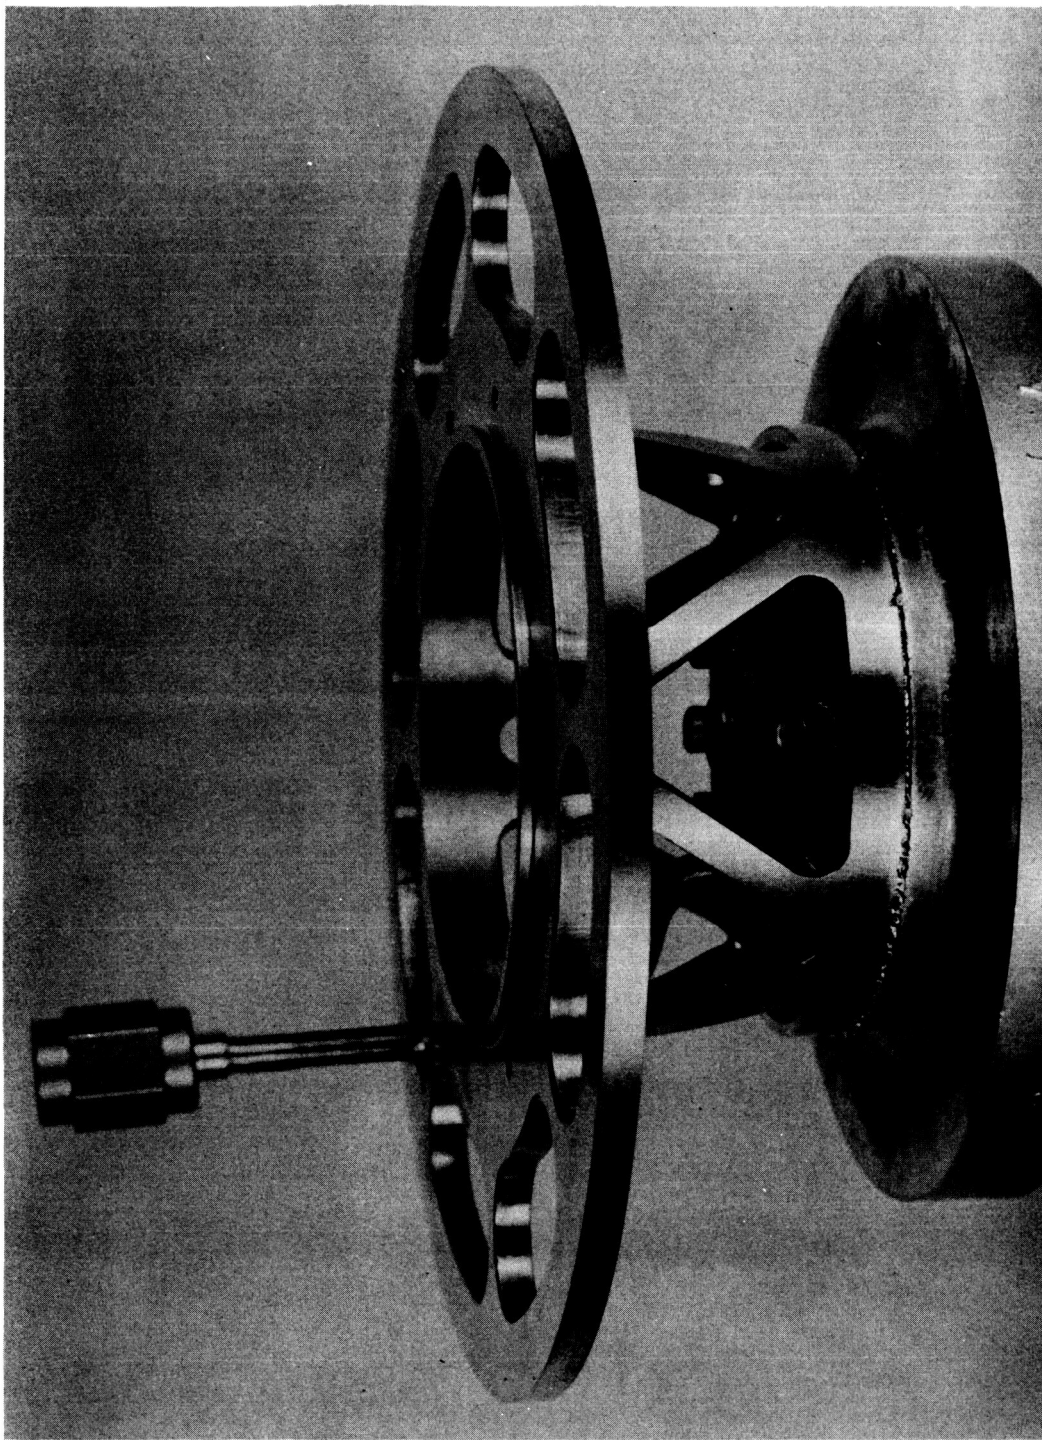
100-lb Injector After Electron Beam Welding
